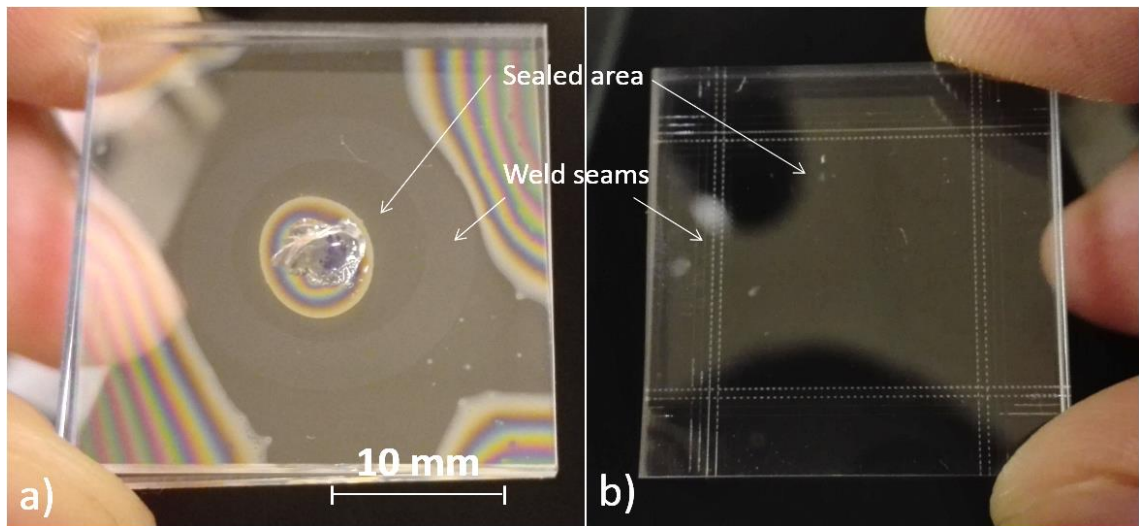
Illustration of sealing structure with ultrafast laser welding.
